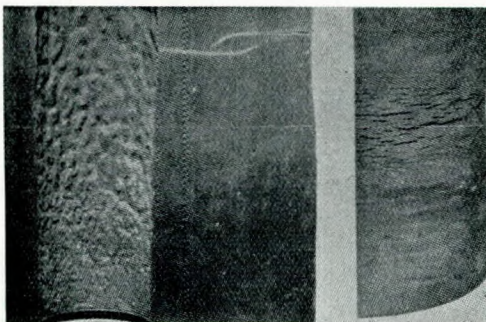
S.M. steel. Burnt piston rod. Cracks only on the outside.
